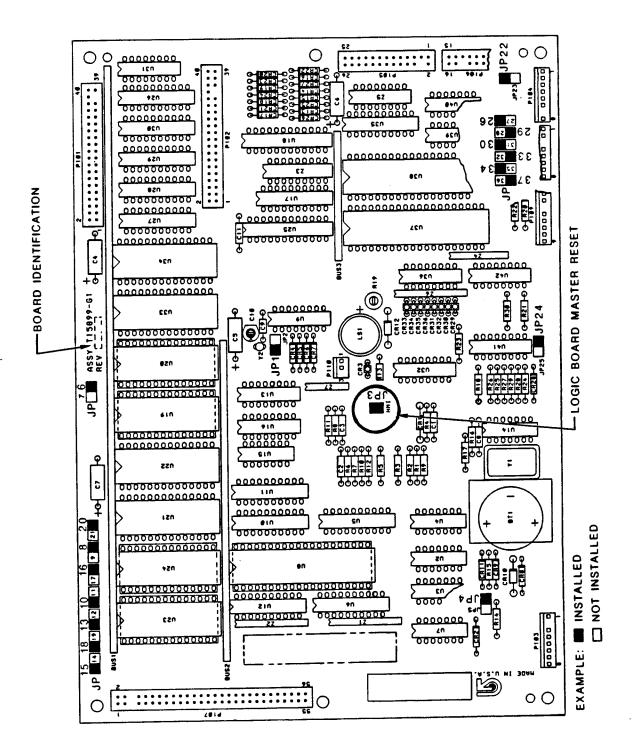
JUMPER SETTINGS FOR PWB ASSEMBLY T15899
